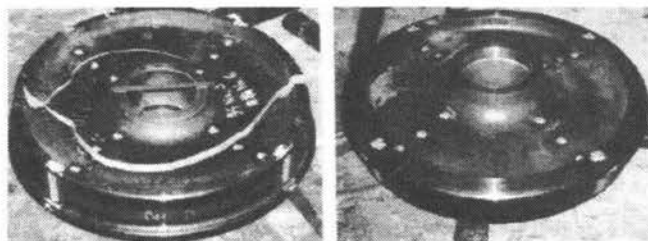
Reproduction of Wheel Brittle Fracture (left: Fracture)
